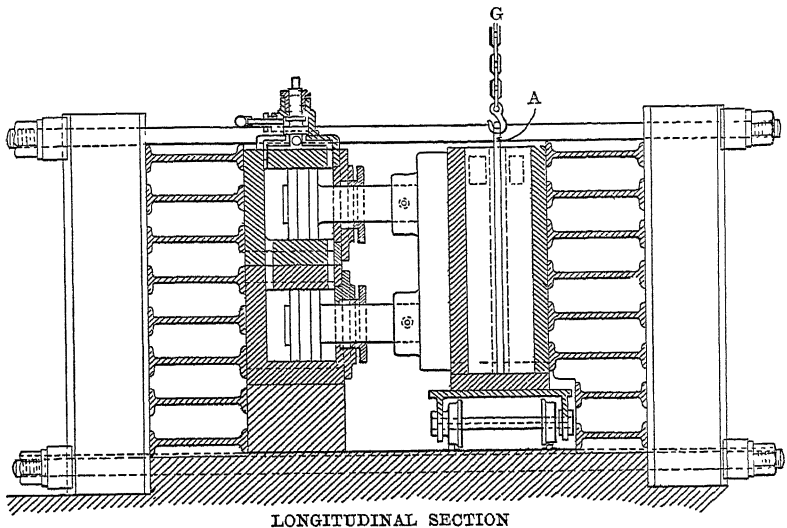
ILLINGWORTH CASTING-MACHINE FOR LARGE INGOTS IN MOLDS ON WHEELS.
